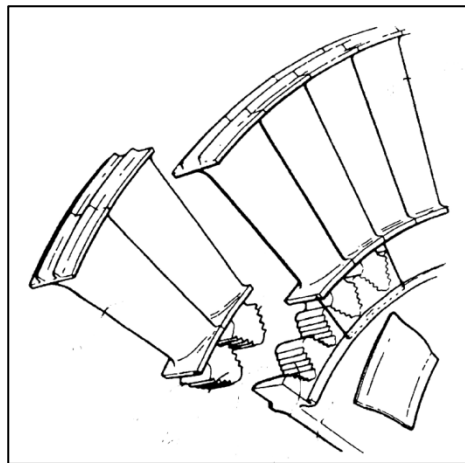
Rotor disc for gas turbine engine. Reprinted Phipps, Anthony B. (Derby, GB), *Rotor disc for gas turbine engine*, 2005.
